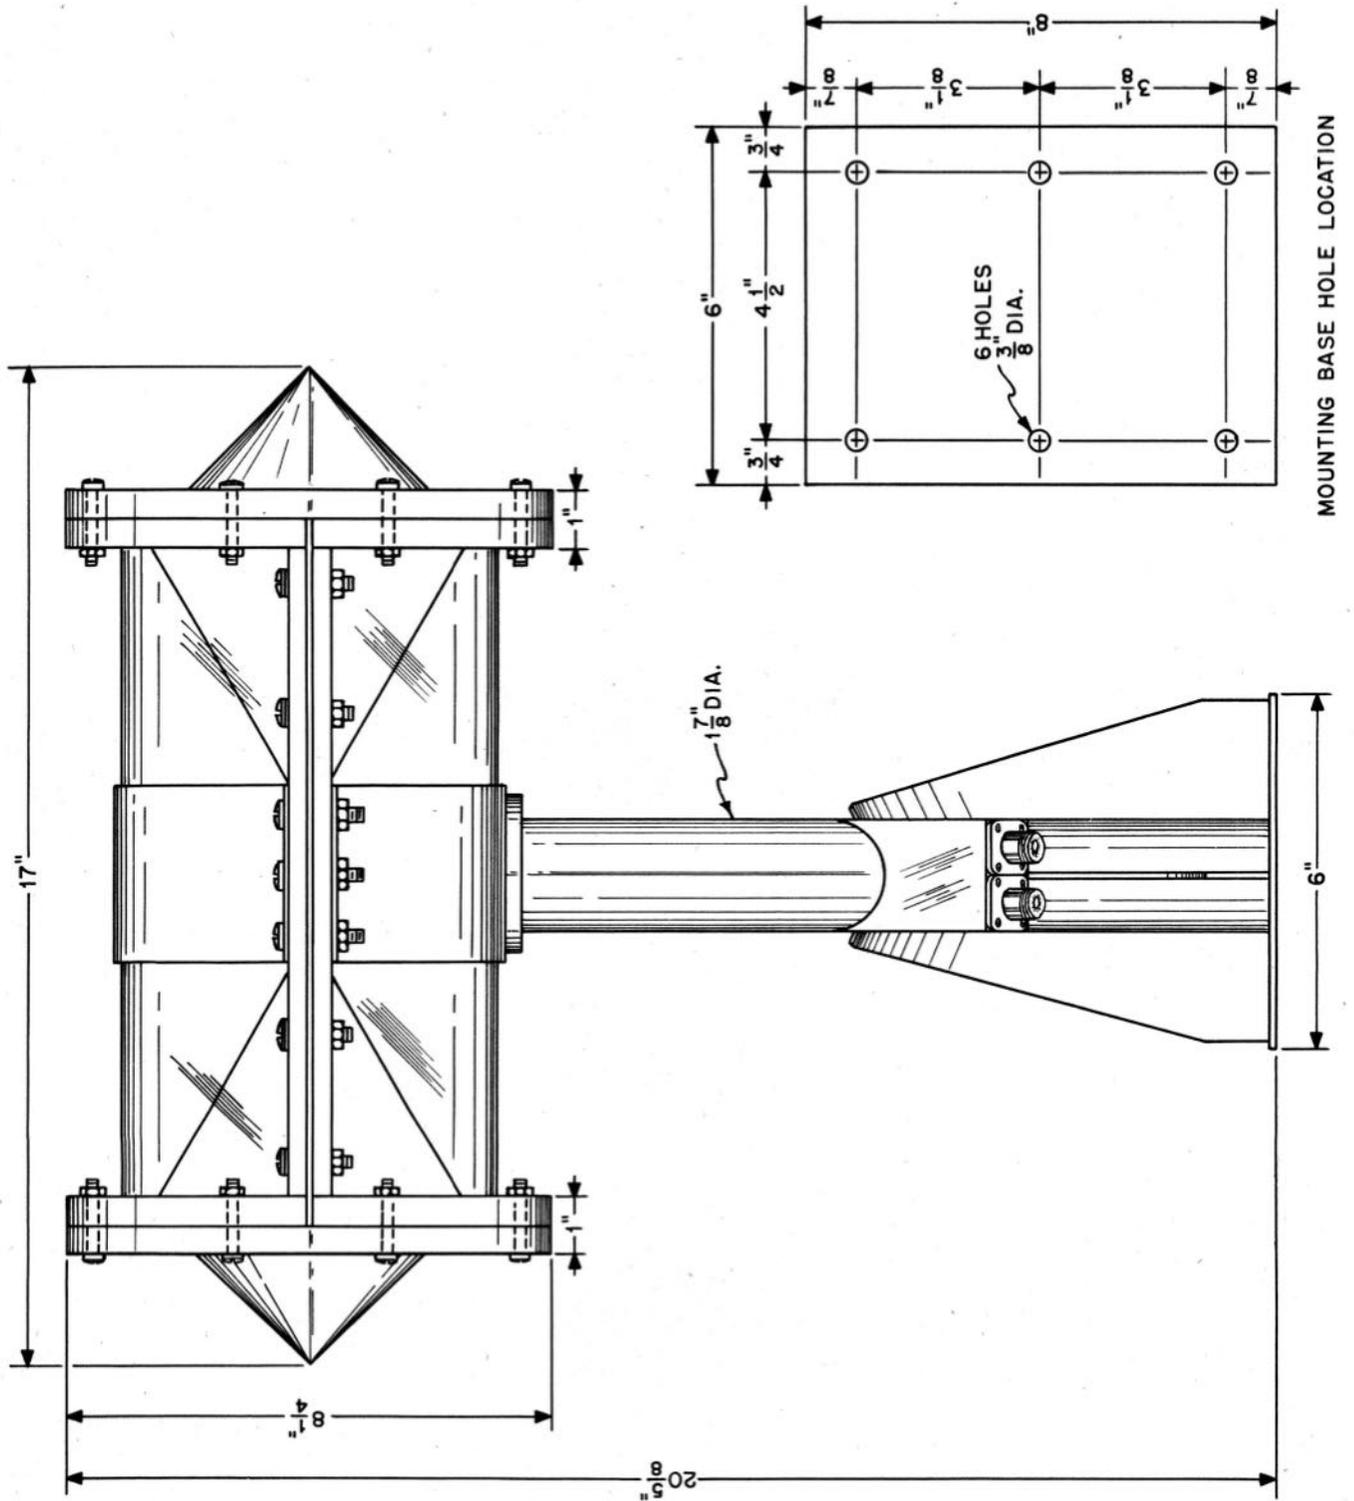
Double Cone Antenna AS-57/SPR-1, Outline Dimensional.
